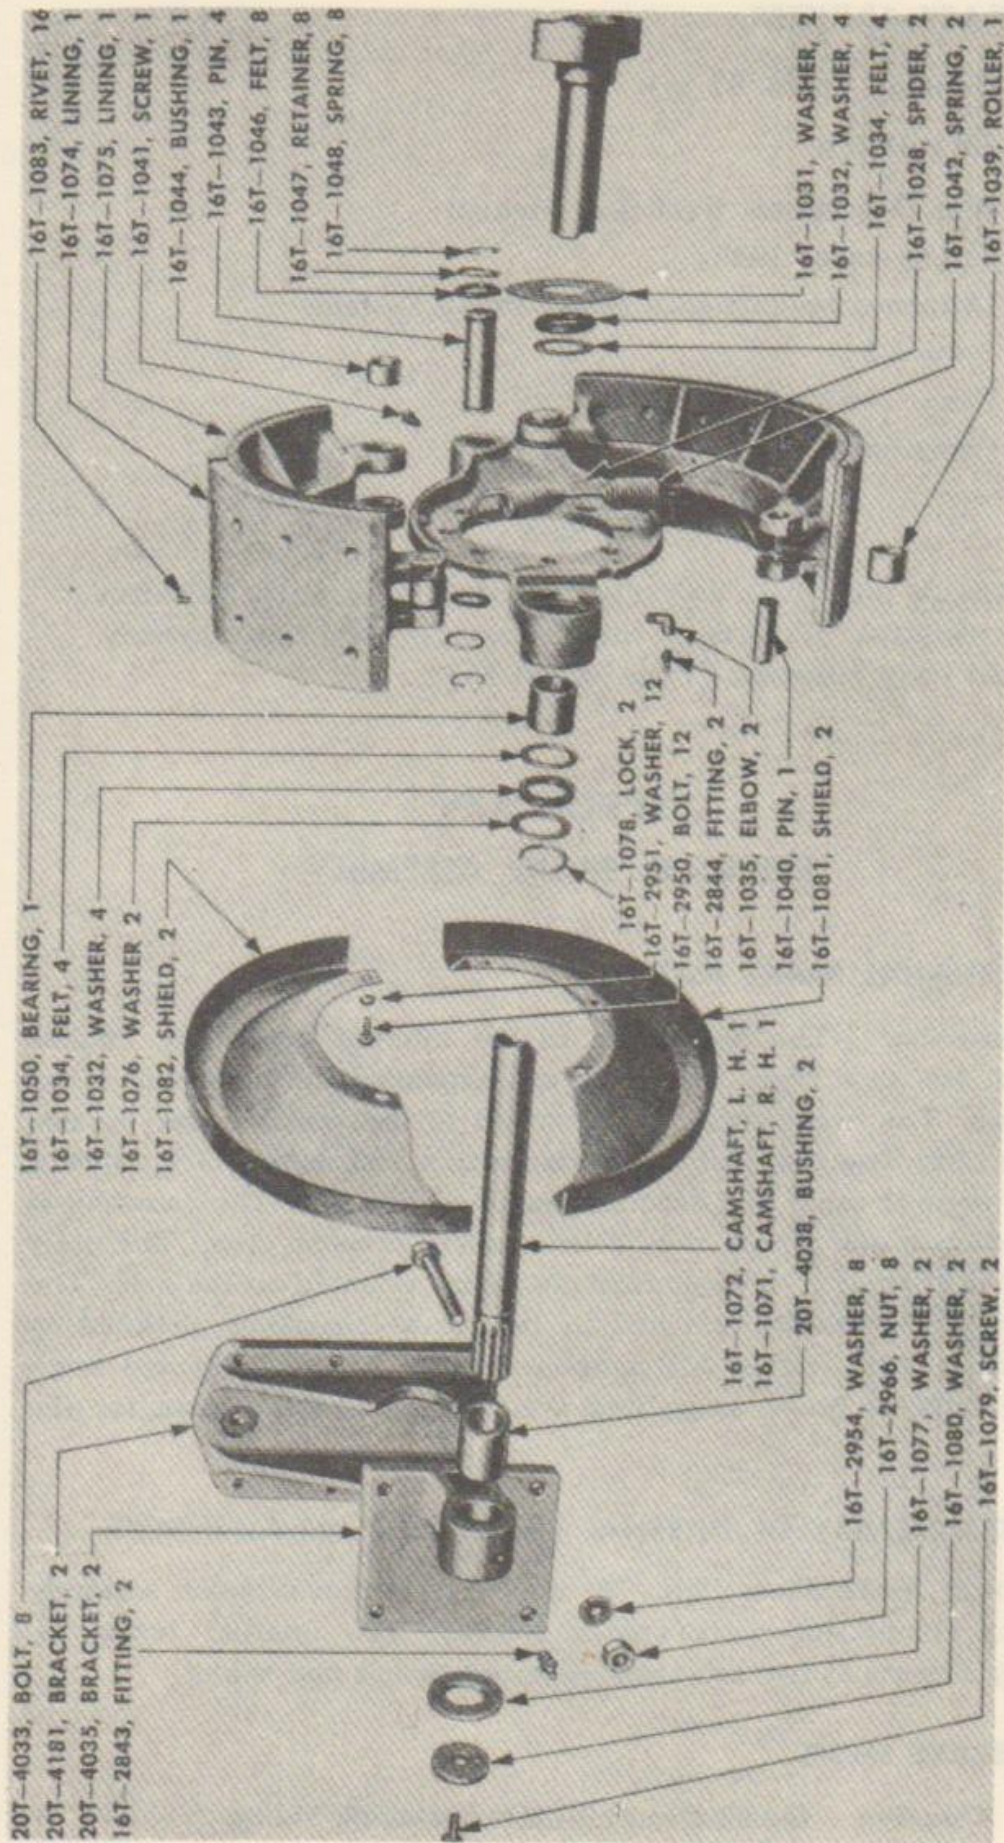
DOLLY INTERNAL BRAKE ASSEMBLY—EXPLODED VIEW
